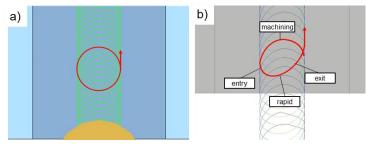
Groove milling strategies with: a) Sinumerik generated tool path; b) individually designed tool path
